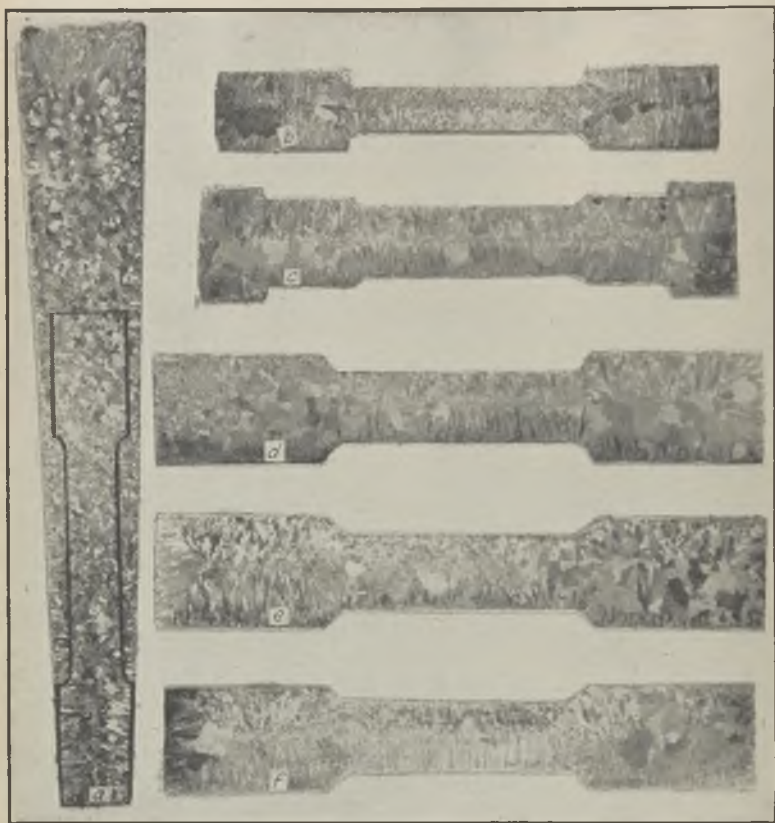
MEDIAL LONGITUDINAL SECTION OF TEST-BARS OF VIRGIN METAL, CAST AT 1,205 DEG. C., THE SECTION BEING PERPENDICULAR TO THE PARTING FACE OF THE SAND MOULD.
